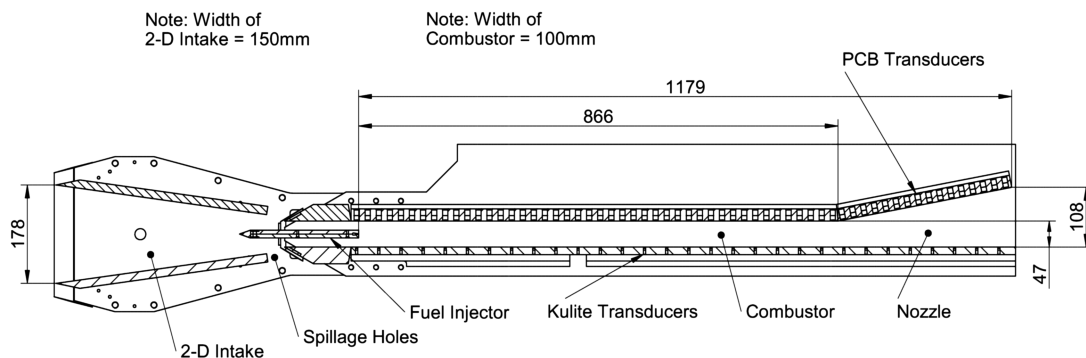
Cross-sectional view of experimental model. Dimensions are in millimeters.
